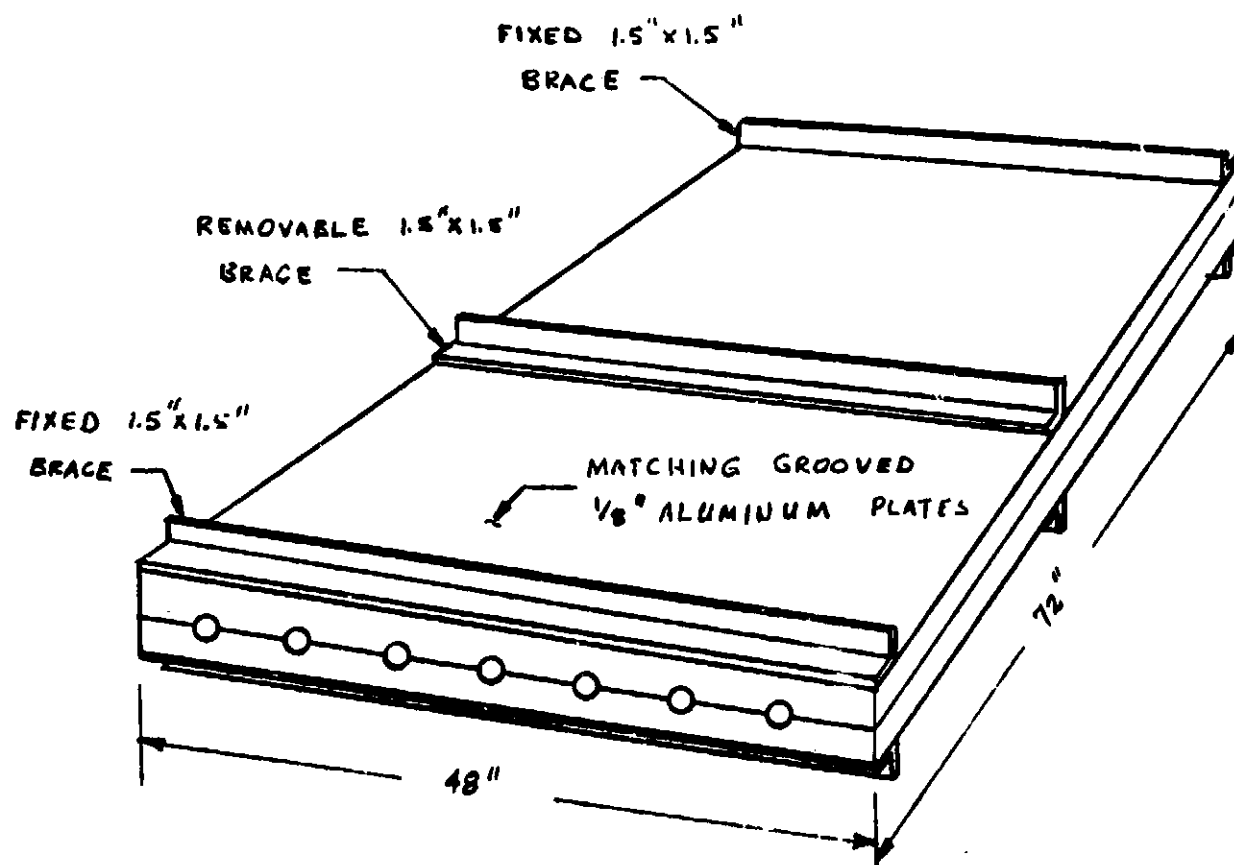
DETAILS OF GROOVED TOOLING PLATES
